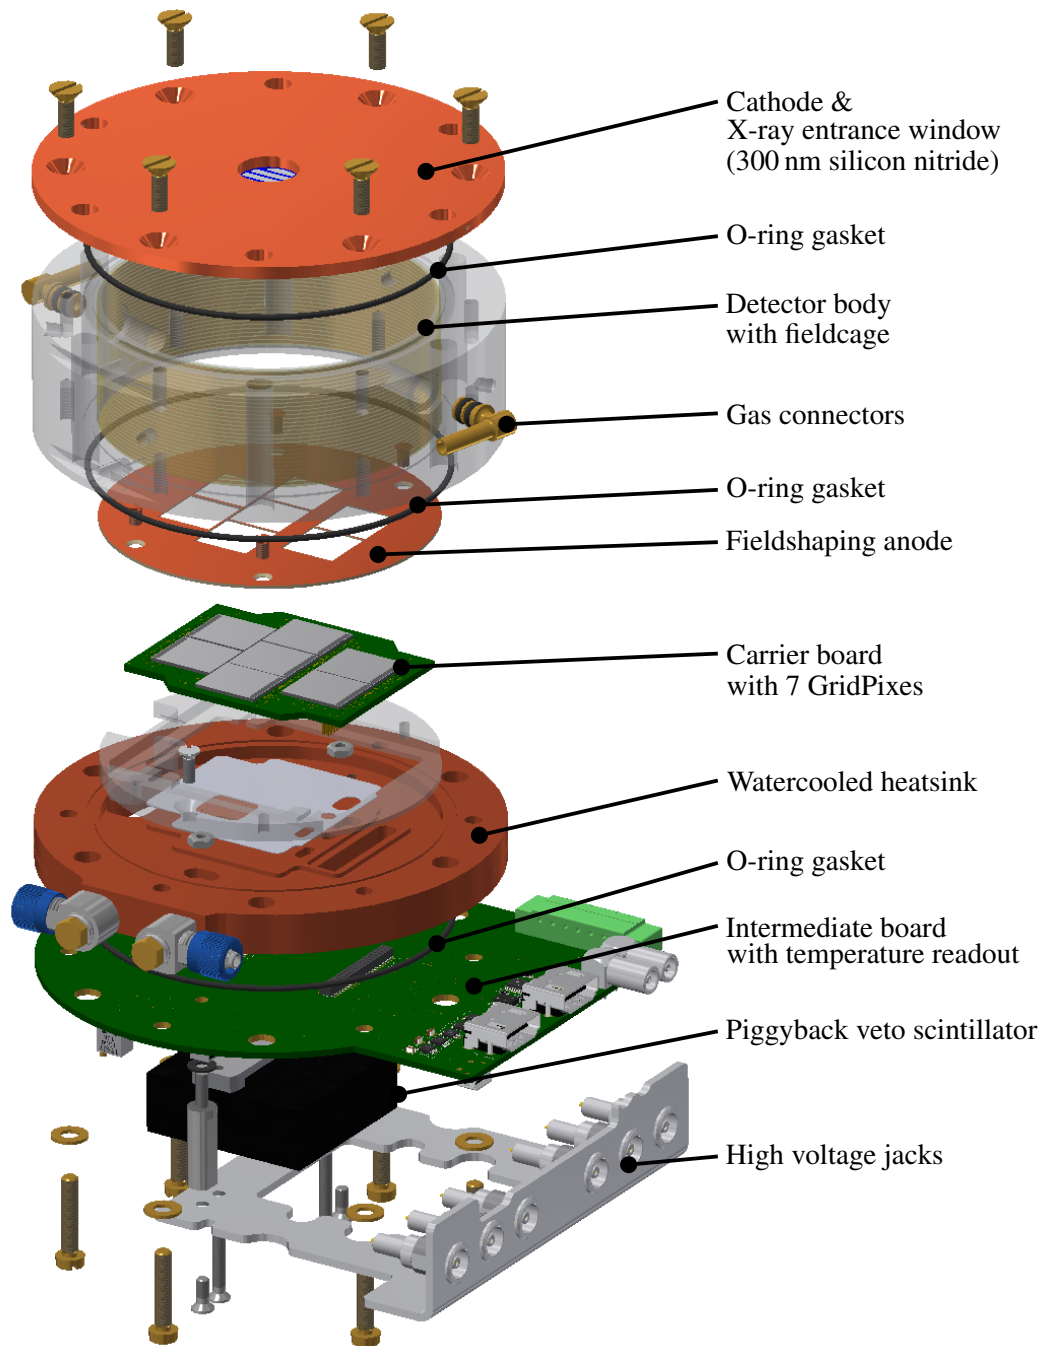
Exploded CAD drawing of the upgraded InGrid based X-ray detector with main parts labelled. A CAD drawing of the assembled detector with all its supply lines and tubes can be found in Fig. 12.2.
